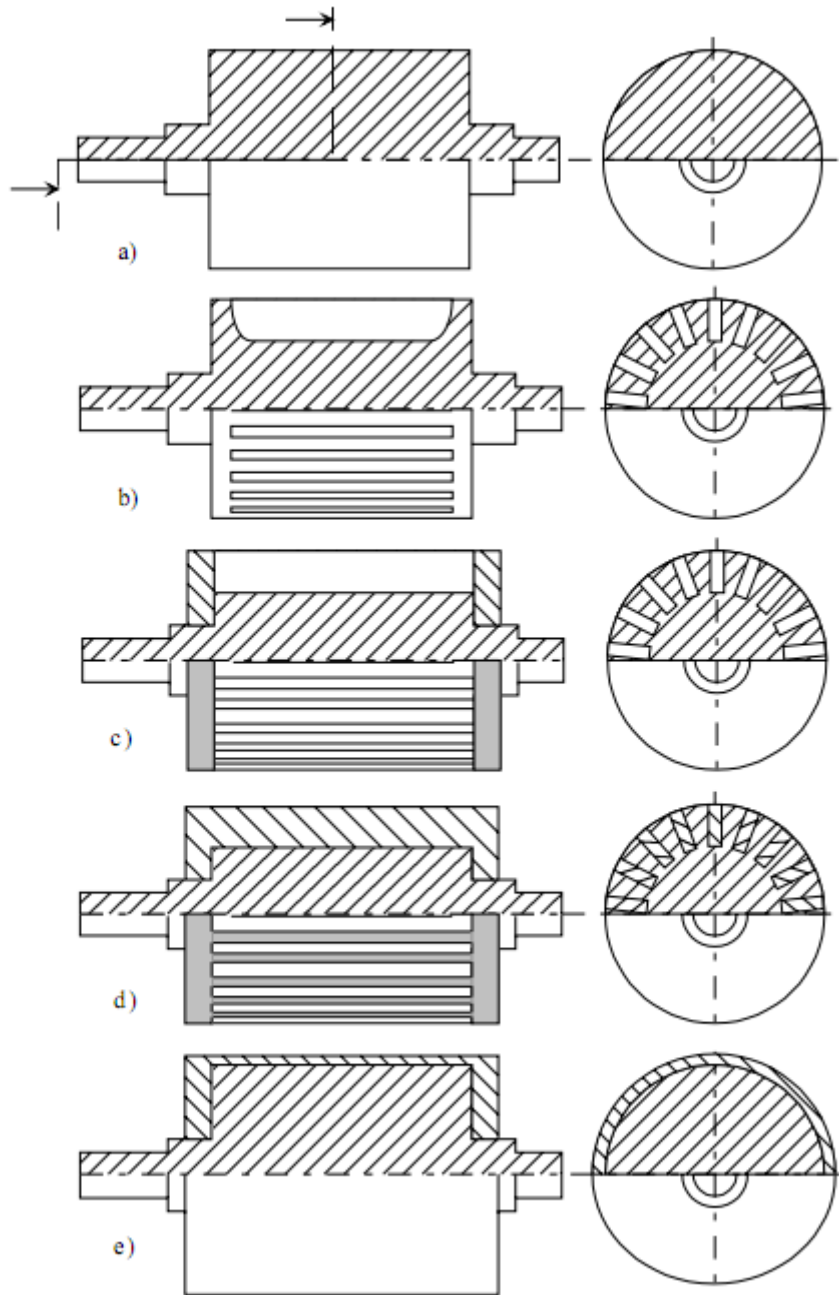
Solid Rotor Constructions: a) smooth solid rotor, b) slitted solid rotor, c) slitted solid rotor with end rings, d) squirrel-cage rotor, e) coated smooth solid rotor. Gieras (1995)
